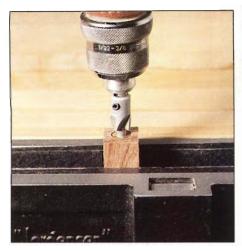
Photo E: Use the pen mill chucked into a portable hand drill to square and dress the ends of the blanks.
